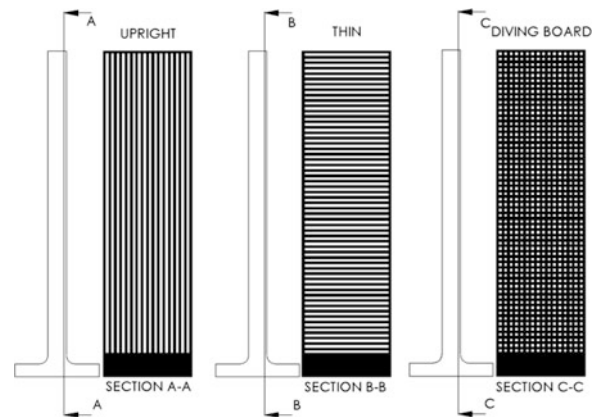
Ink impression of the hatch pattern implemented in the uPrint machine
